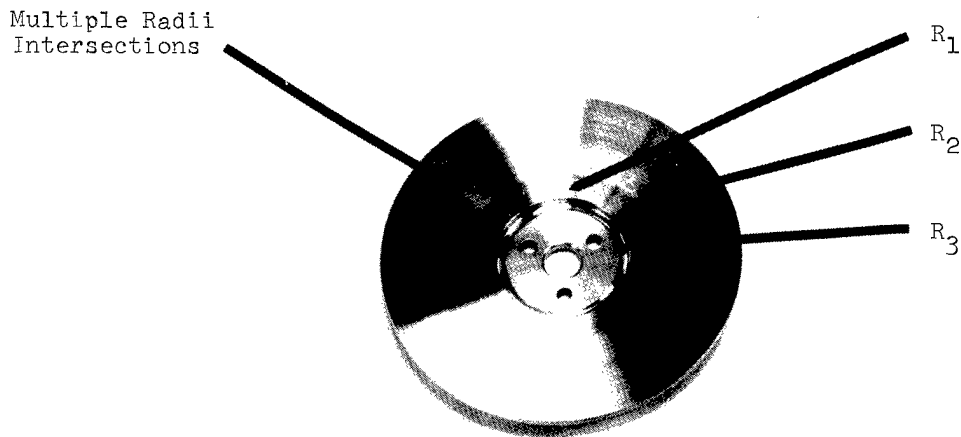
Hyperbola After Machining Multiple Radii On The Nickel Plated Surface. Differences In The Machined Surface Finish Reveal The Use Of Several Successive Cuts
